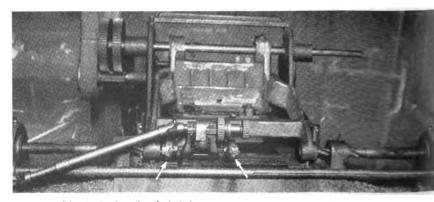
Boring the shaft holes in the bed for a 12x18-in. Gordon press.
